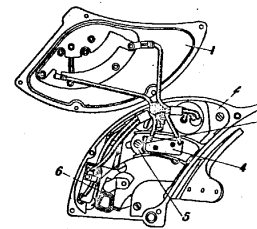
MI19-2 Electric Mechanism Drive Box with Cover Open
